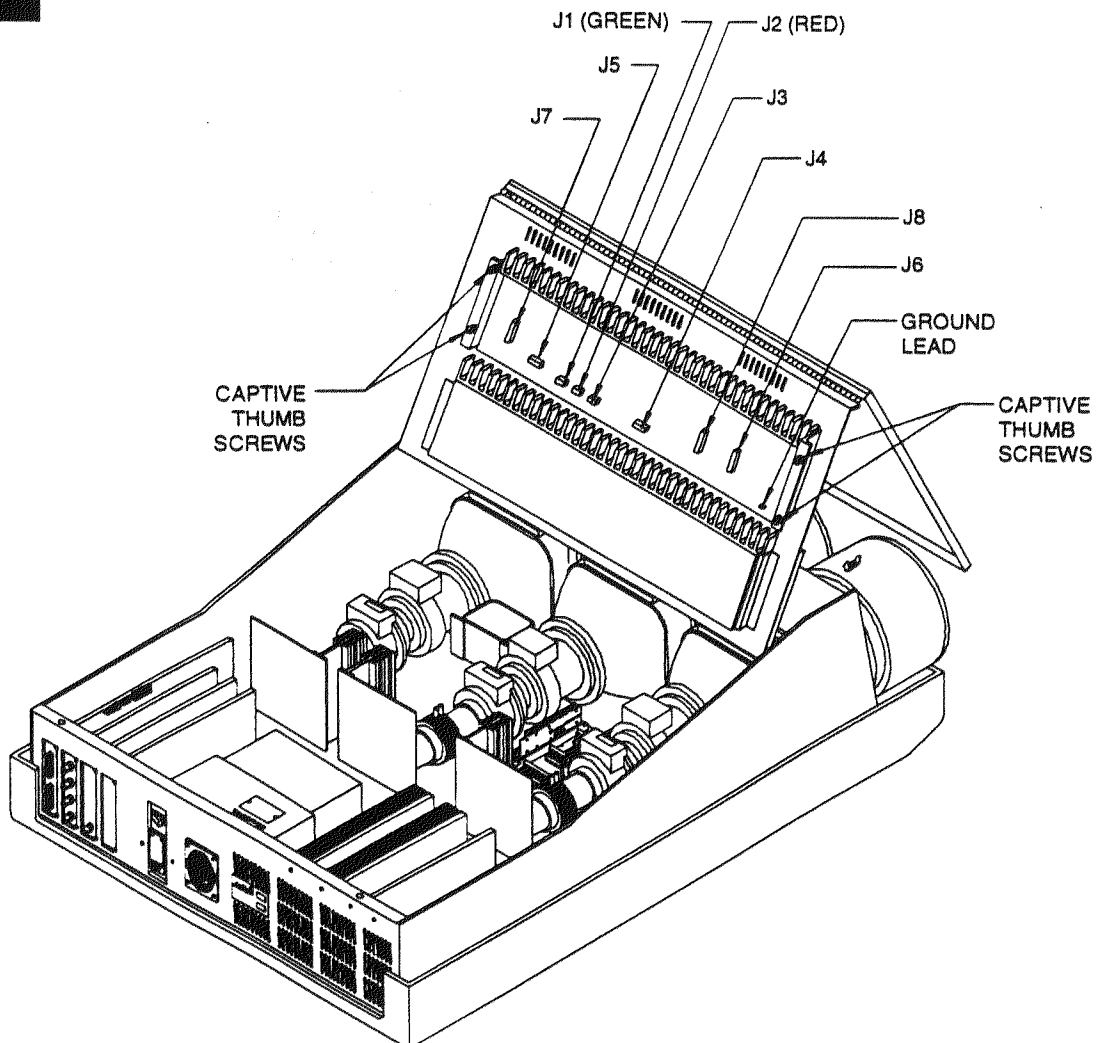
3300 FOCUS MODULATOR BOARD REPLACEMENT.
